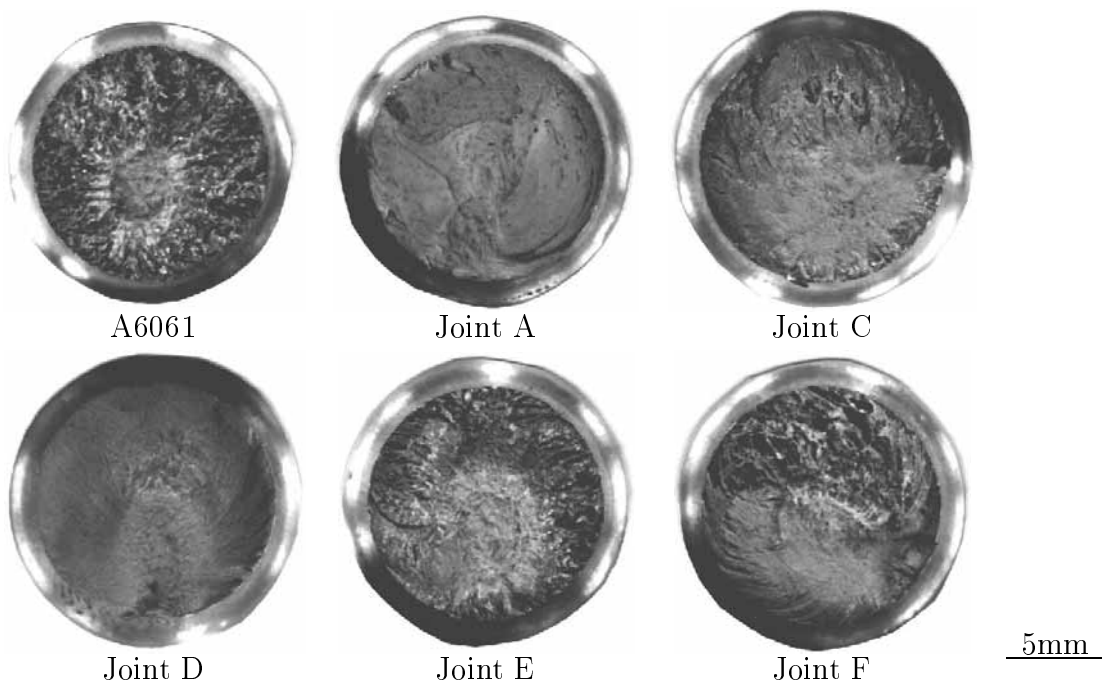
Appearance of fatigue-fractured surfaces.
